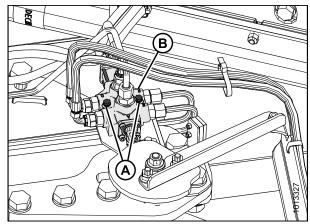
Transport Deploy/Swing Mechanism Assembly
